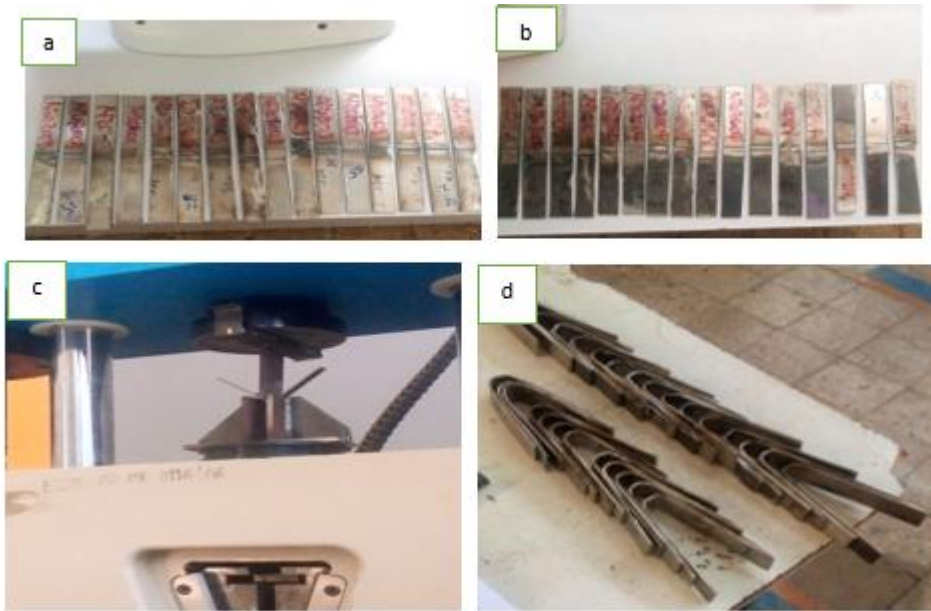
specimens: a) similar before testing, b) dissimilar before testing, c) specimen under 3-point flexural testing, and d) specimens after testing
